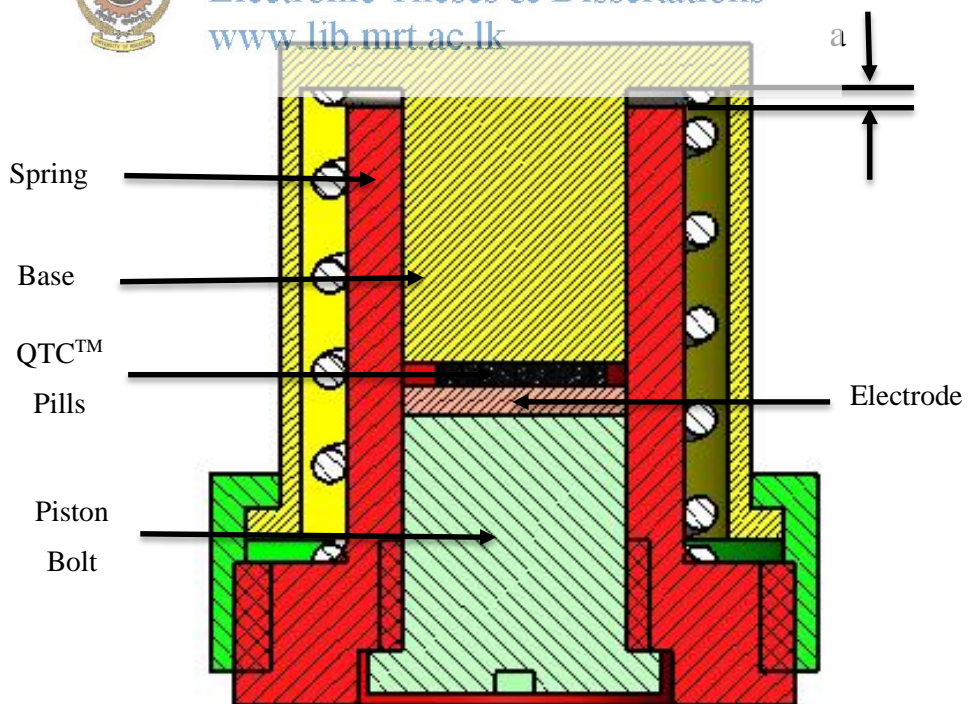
Sectional front elevation of proposed design of novel enclosed sensor structure
